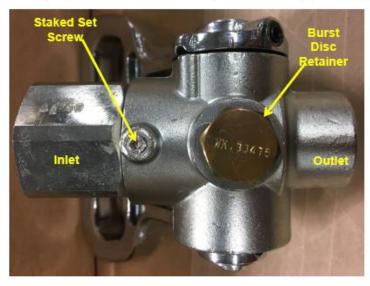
Horn-Valve Underside View (Horn removed from outlet for clarity only)
